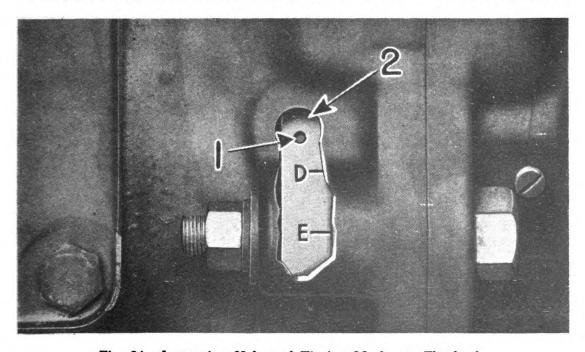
Inspection Hole and Timing Marks on Flywheel
